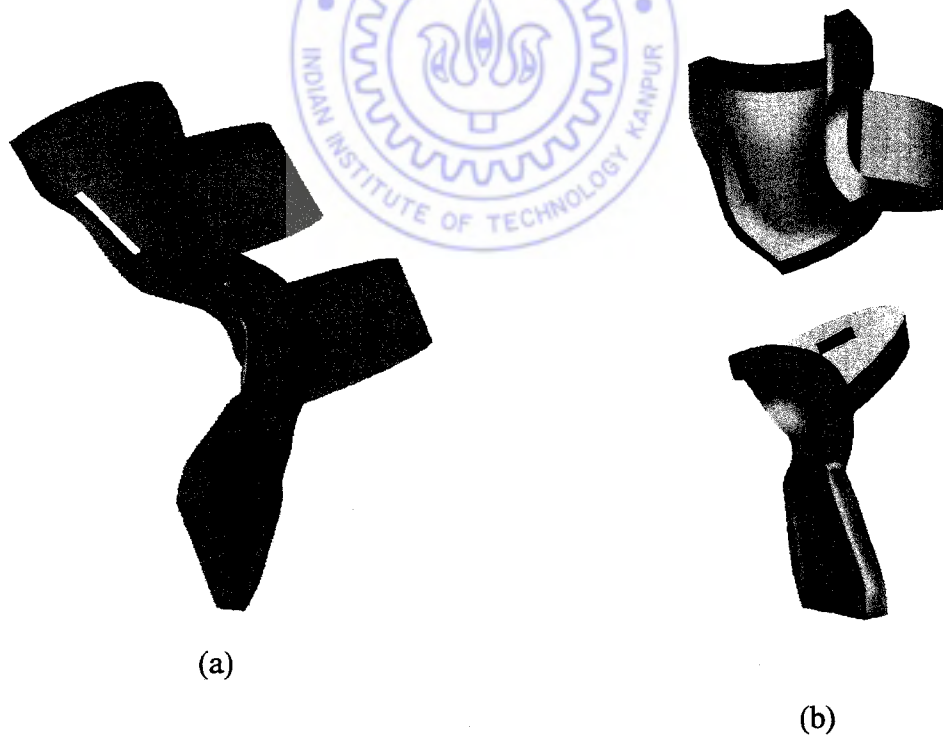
AFO having arrangement for externally fixing single hemispherical ball & socket joint (a) one piece (b) two piece
